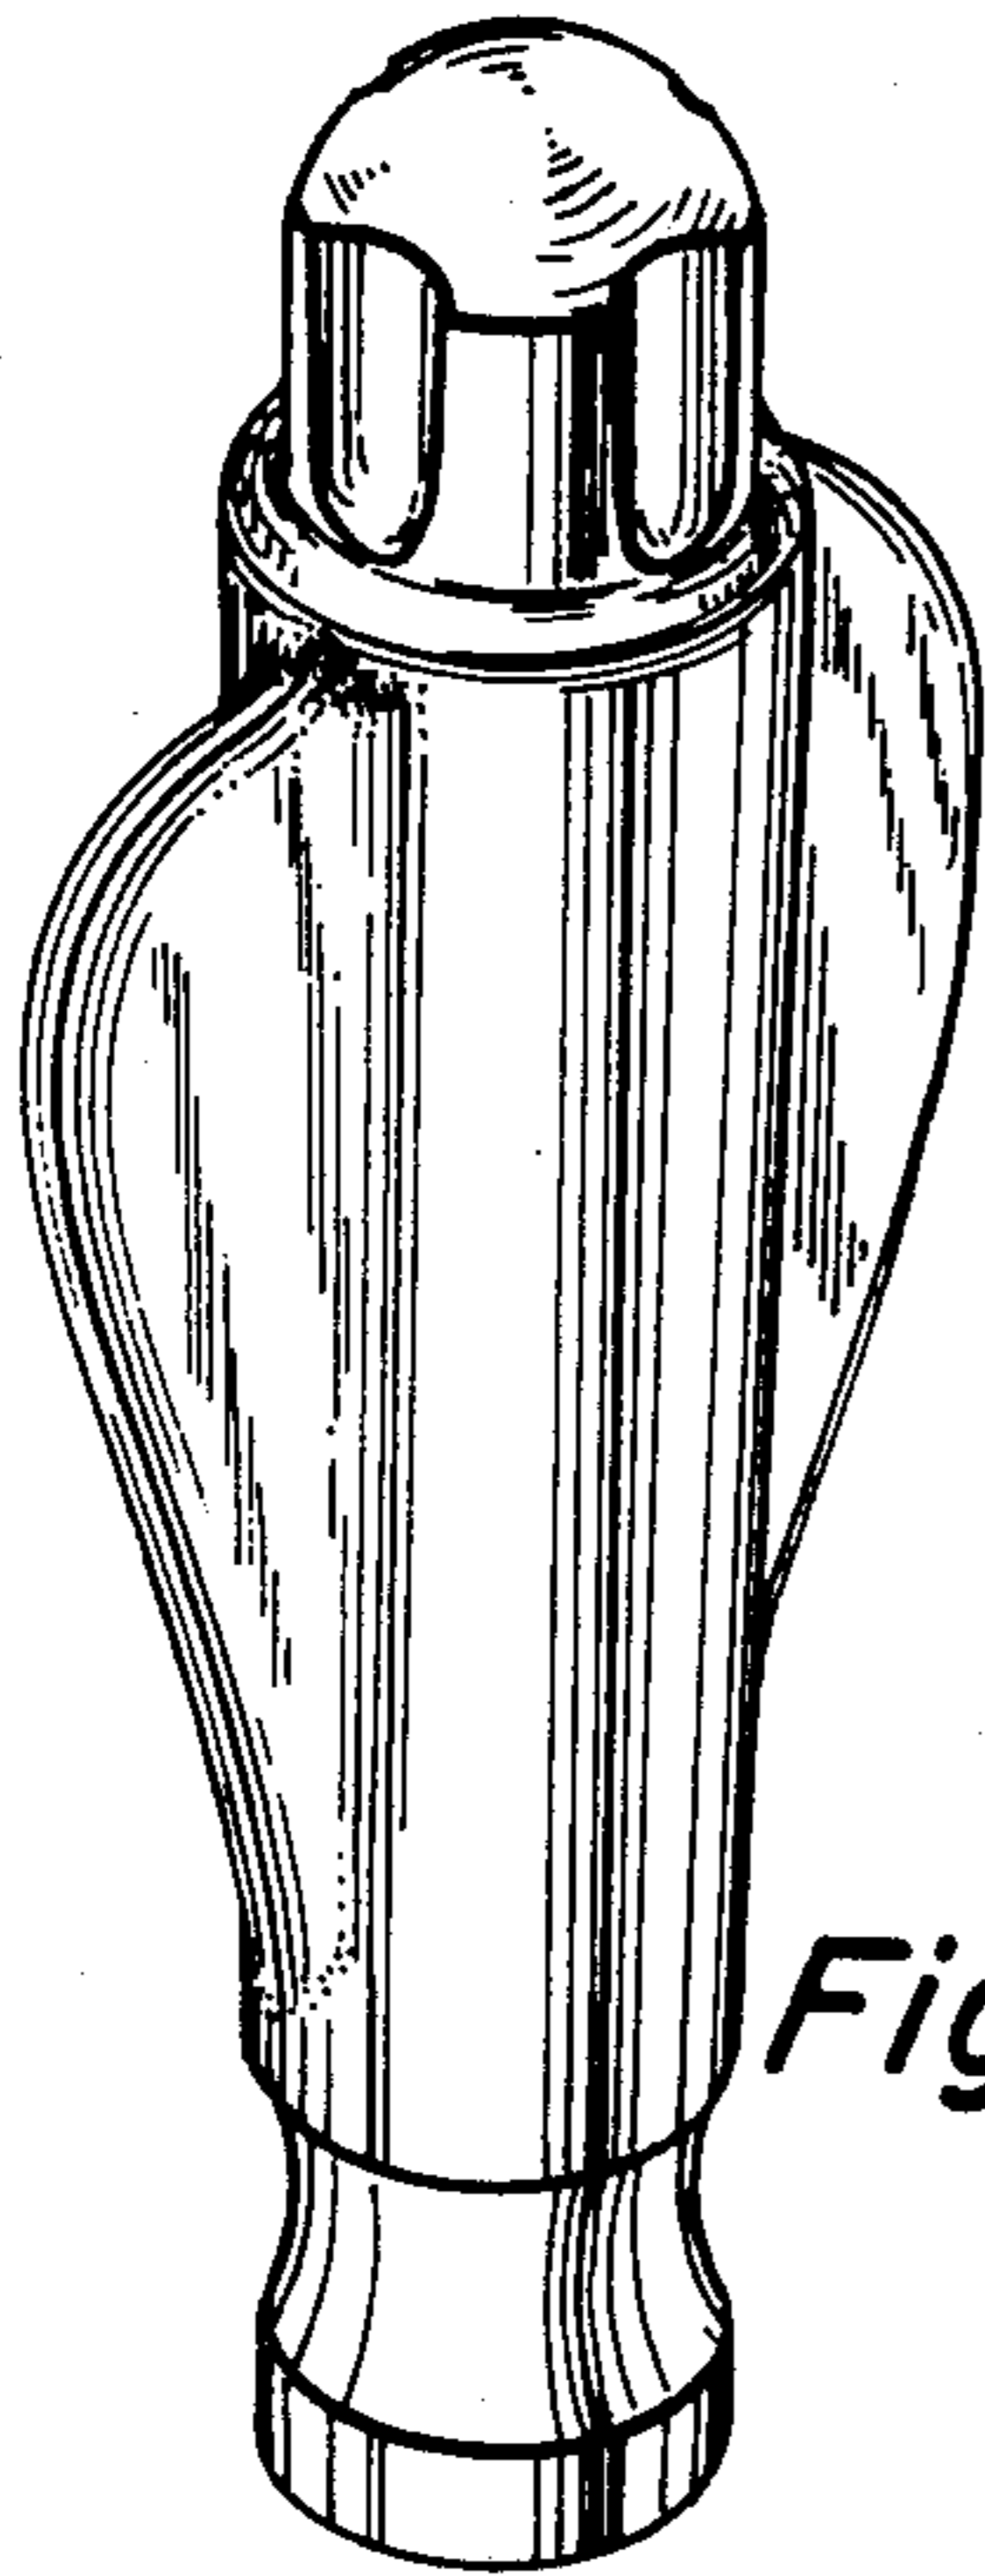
is a perspective view of another tool handle particularly useful for screwdrivers of my invention.
